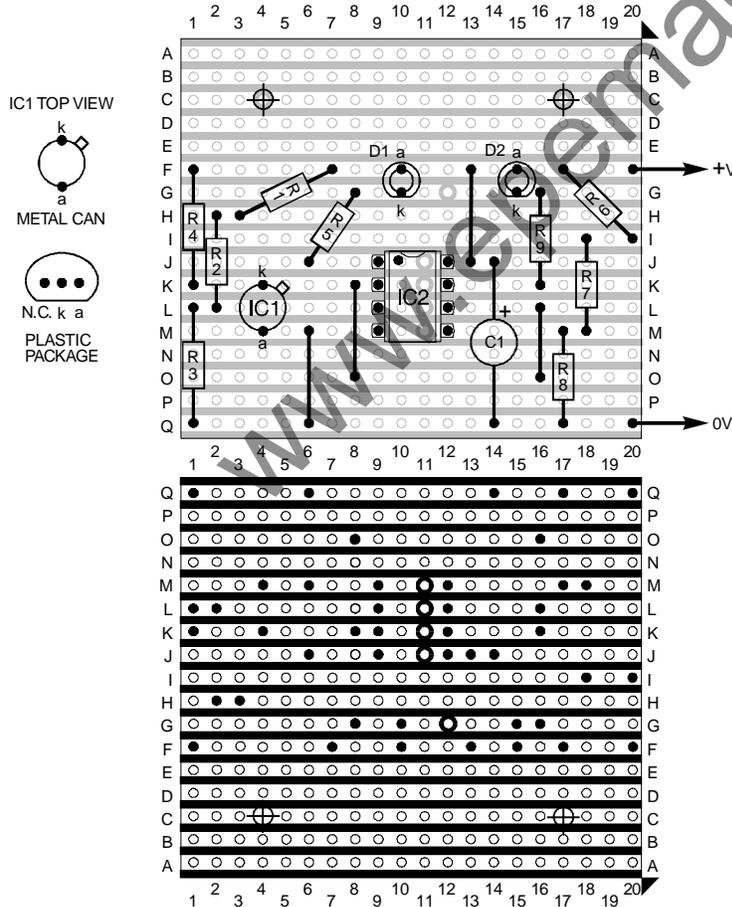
Stripboard topside component layout and details of breaks required in the copper tracks.
